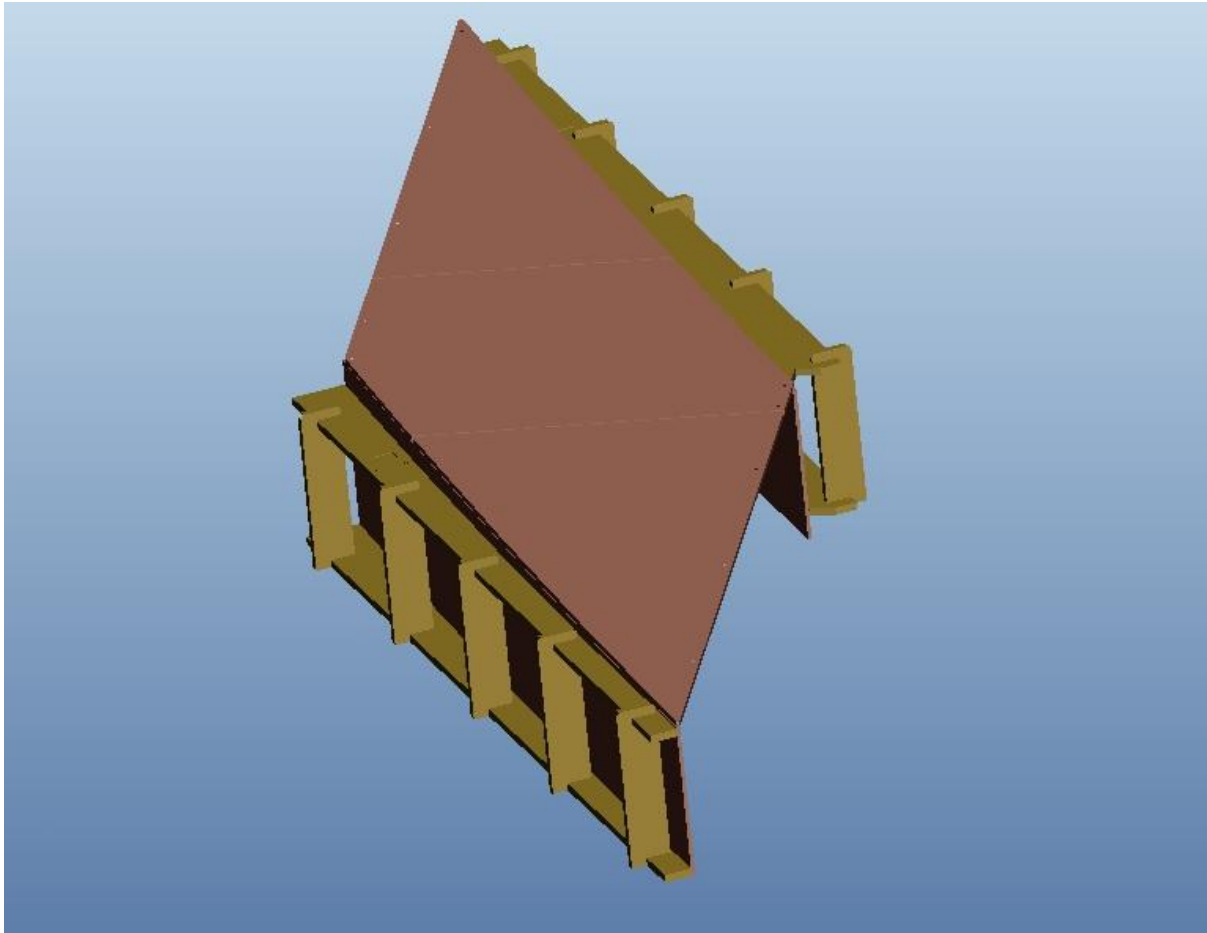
Curved sidewall framework for diverging (positive) section with roof sub-sections
